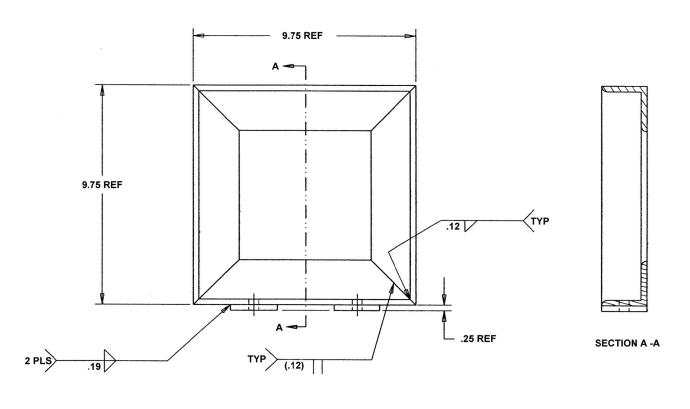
Ring Brace Assembly, Part No. 17A631016. (Sheet 1 of 2)
